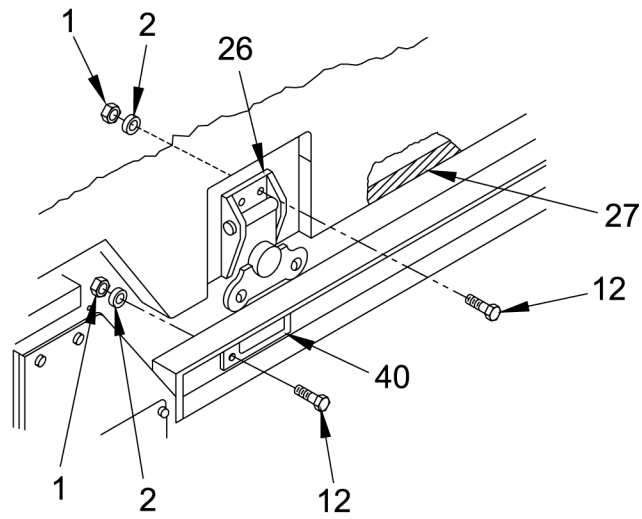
Frame and Housing Assembly/Main Access Cover (Sheet 3 of 4).
